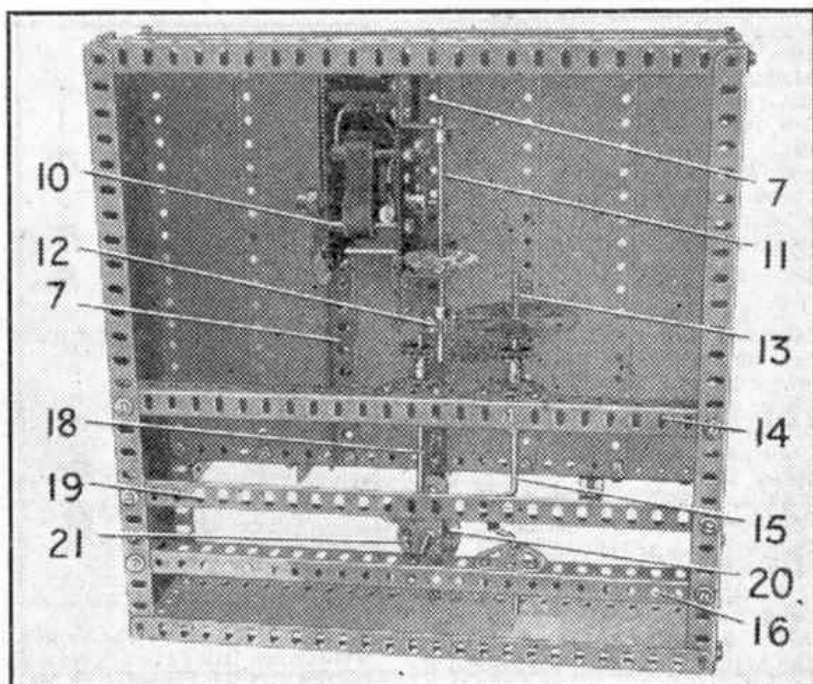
An underneath view of the base of the Meccano Conjurer, showing the driving Motor and arrangement of the gearing.
